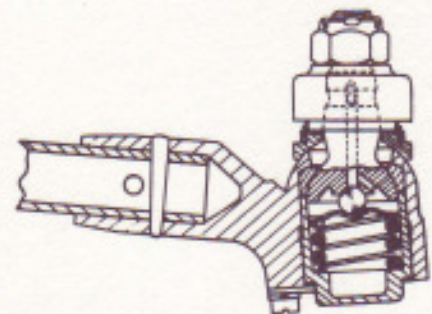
SECTION THROUGH A BALL JOINT (OUTER) OF A CROSS STEERING TUBE.
